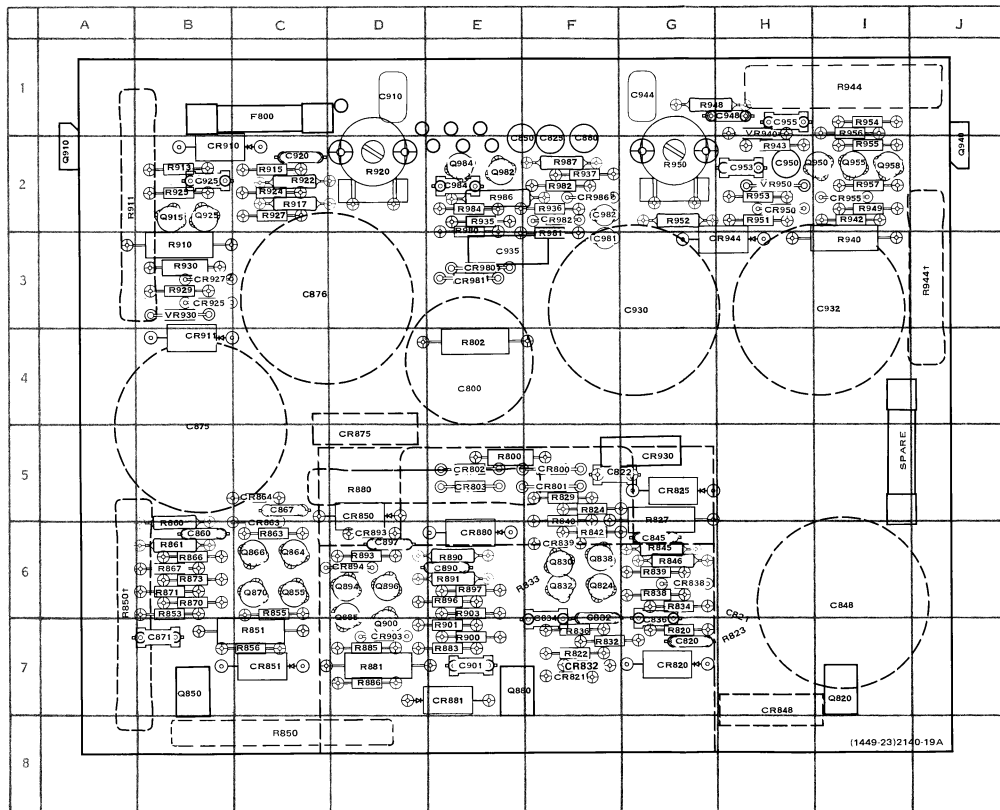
Low Voltage and Calibrator circuit board assembly A-7.
